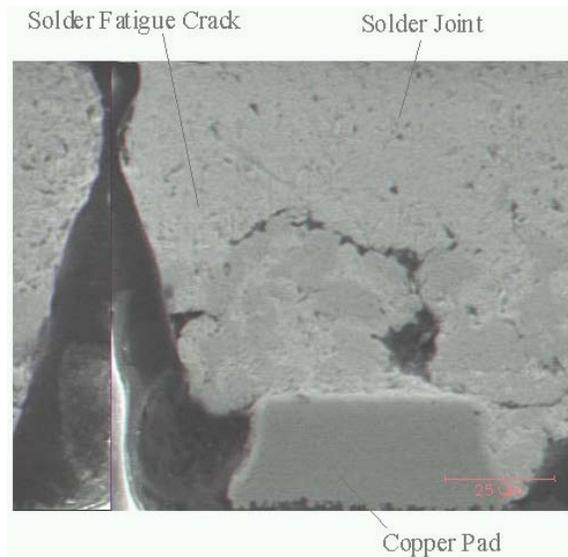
SEM Image of Fatigue Crack Propagation Through Solder Defects
